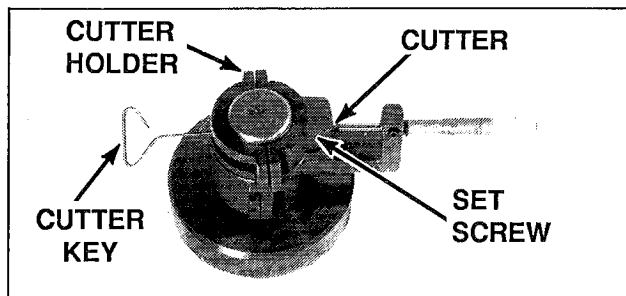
CUTTER HOLDER ON MICROMETER ASSY.
